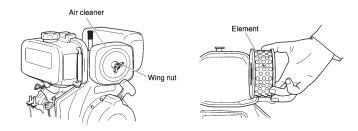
Engine Air Filter and Element VIBRATION CLUTCH ADJUSTMENT
